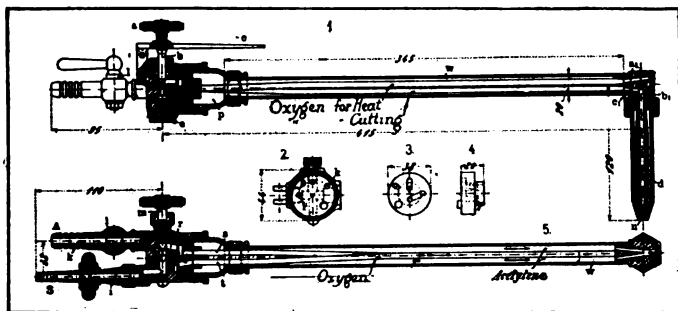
Oxy-acetylene metal-cutting tool—dimensions in millimeters
